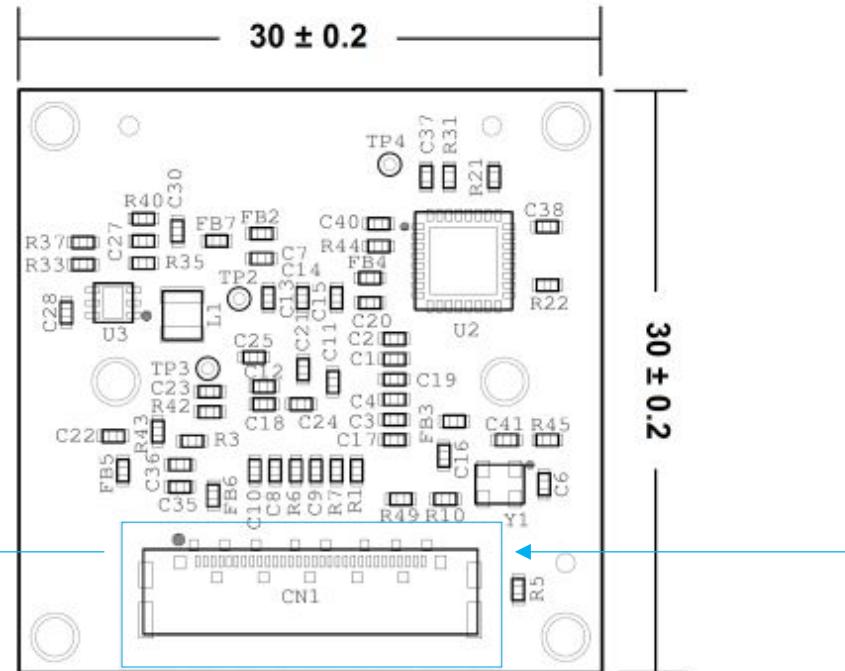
Bottom View of e-CAM222_CUMI2311_MOD
